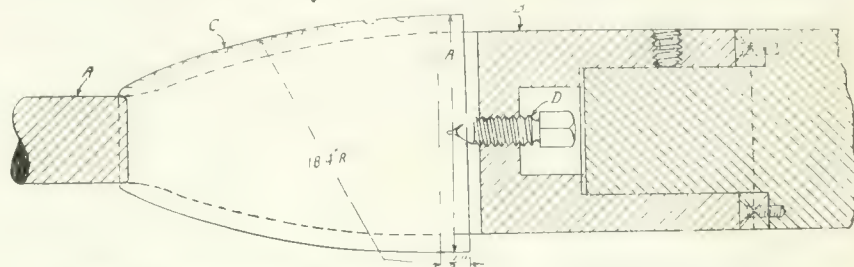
DETACHABLE BORING HEAD WITH FORMED CUTTER.
